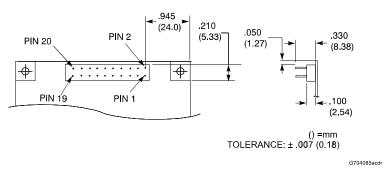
Receiver OEM Board Outline Drawing (Var: -XX2, -XX3, -XX0)
